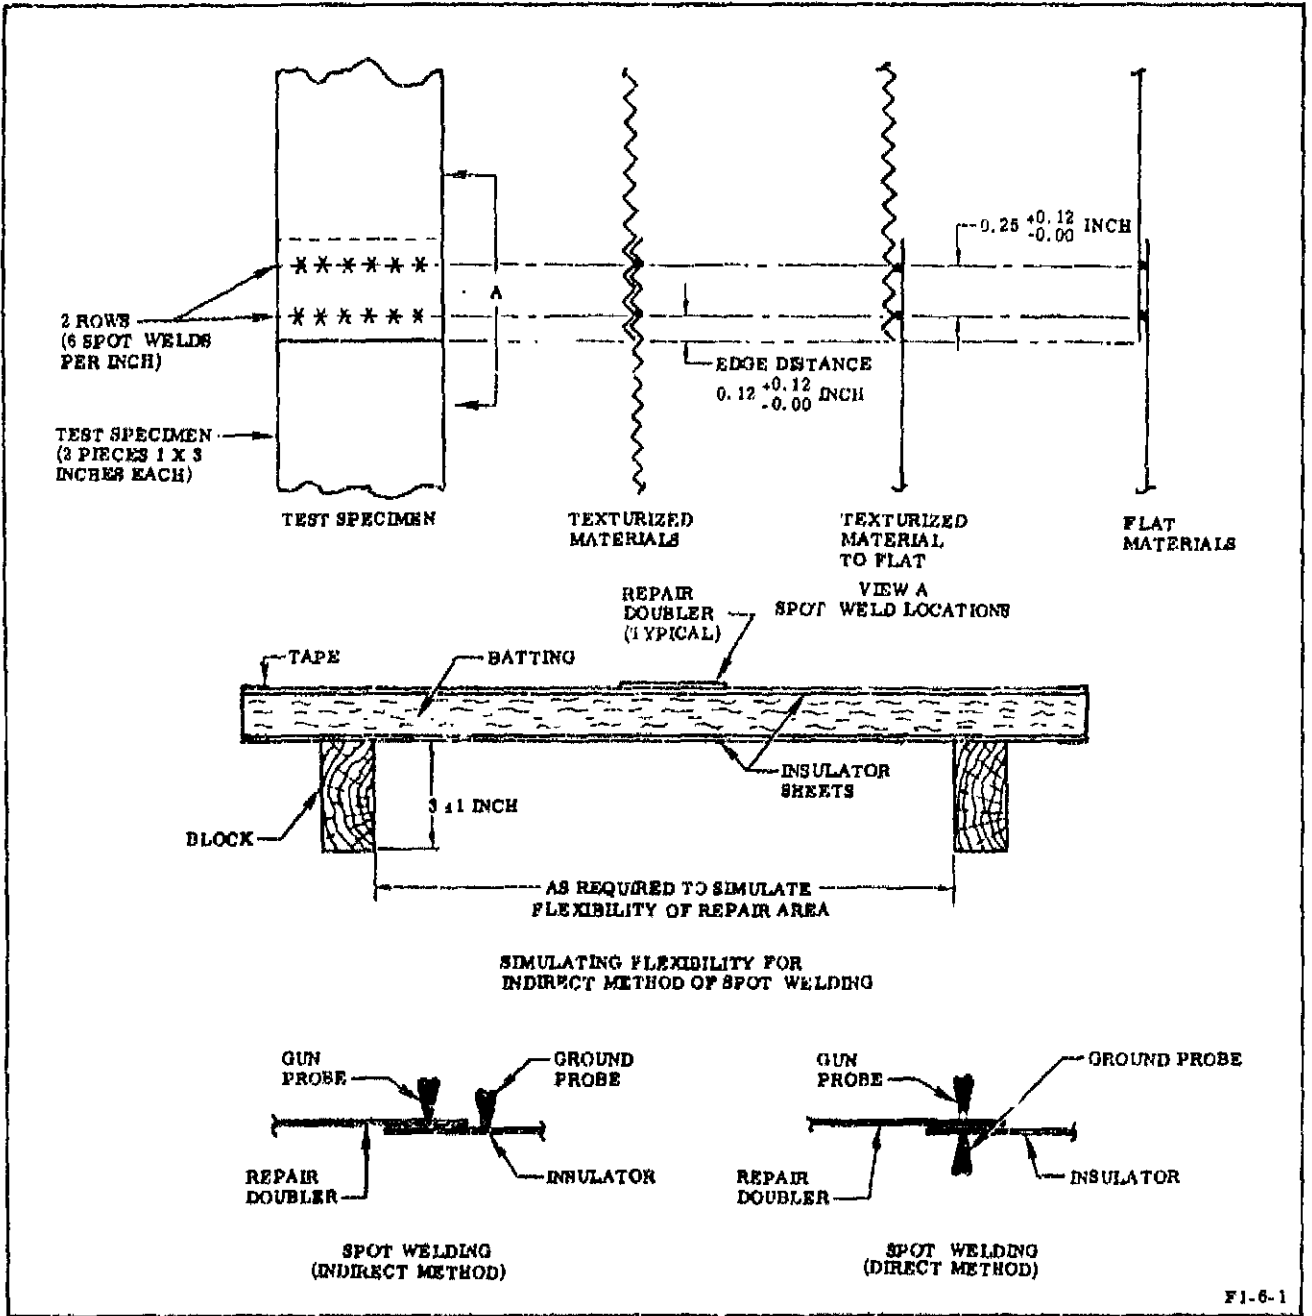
Preparing and Spot-Welding Test Specimen
